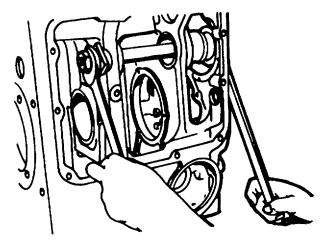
Removal/Reinstallation of Bearing Bushing
